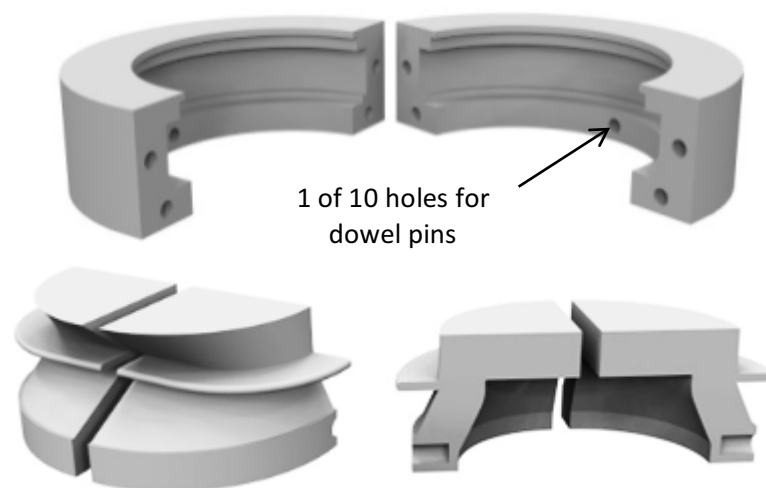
Moulds to make D-shaped surgical mitral valve holder (top) two outer sections (bottom) four hollow inner sections.
